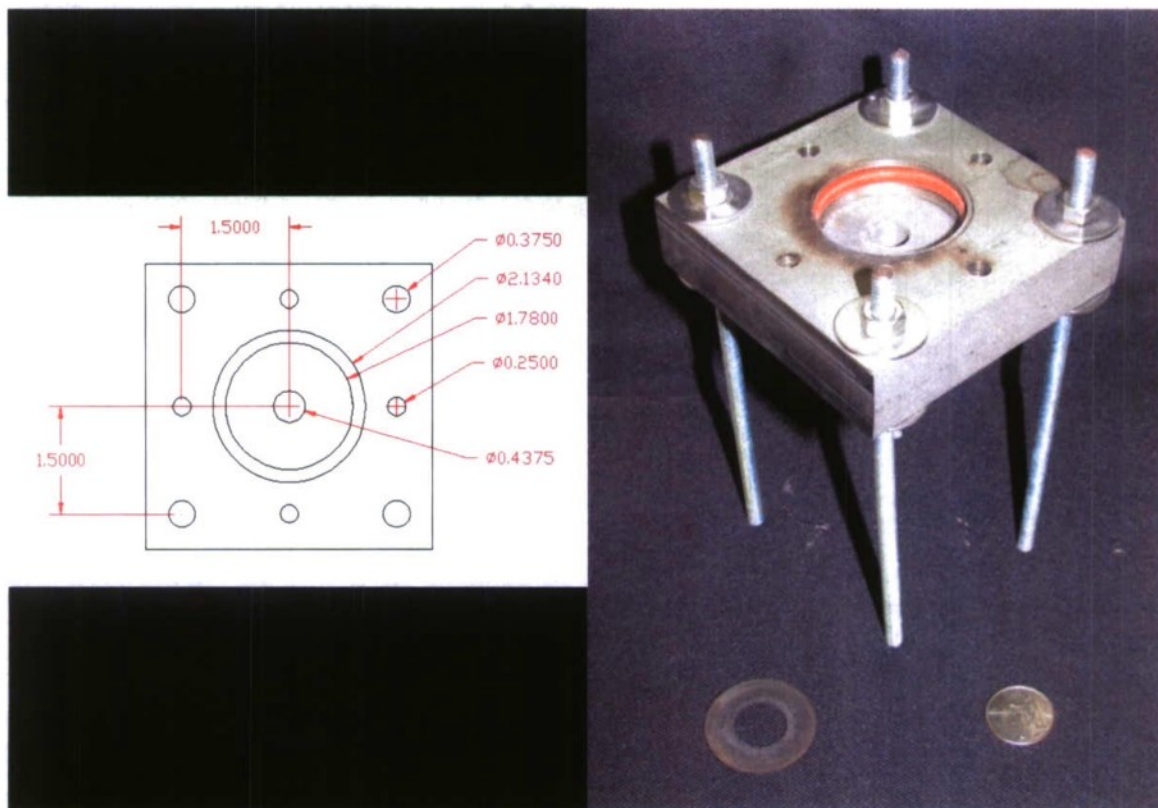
303 Stainless steel bottom plate (dimensions in inches).
